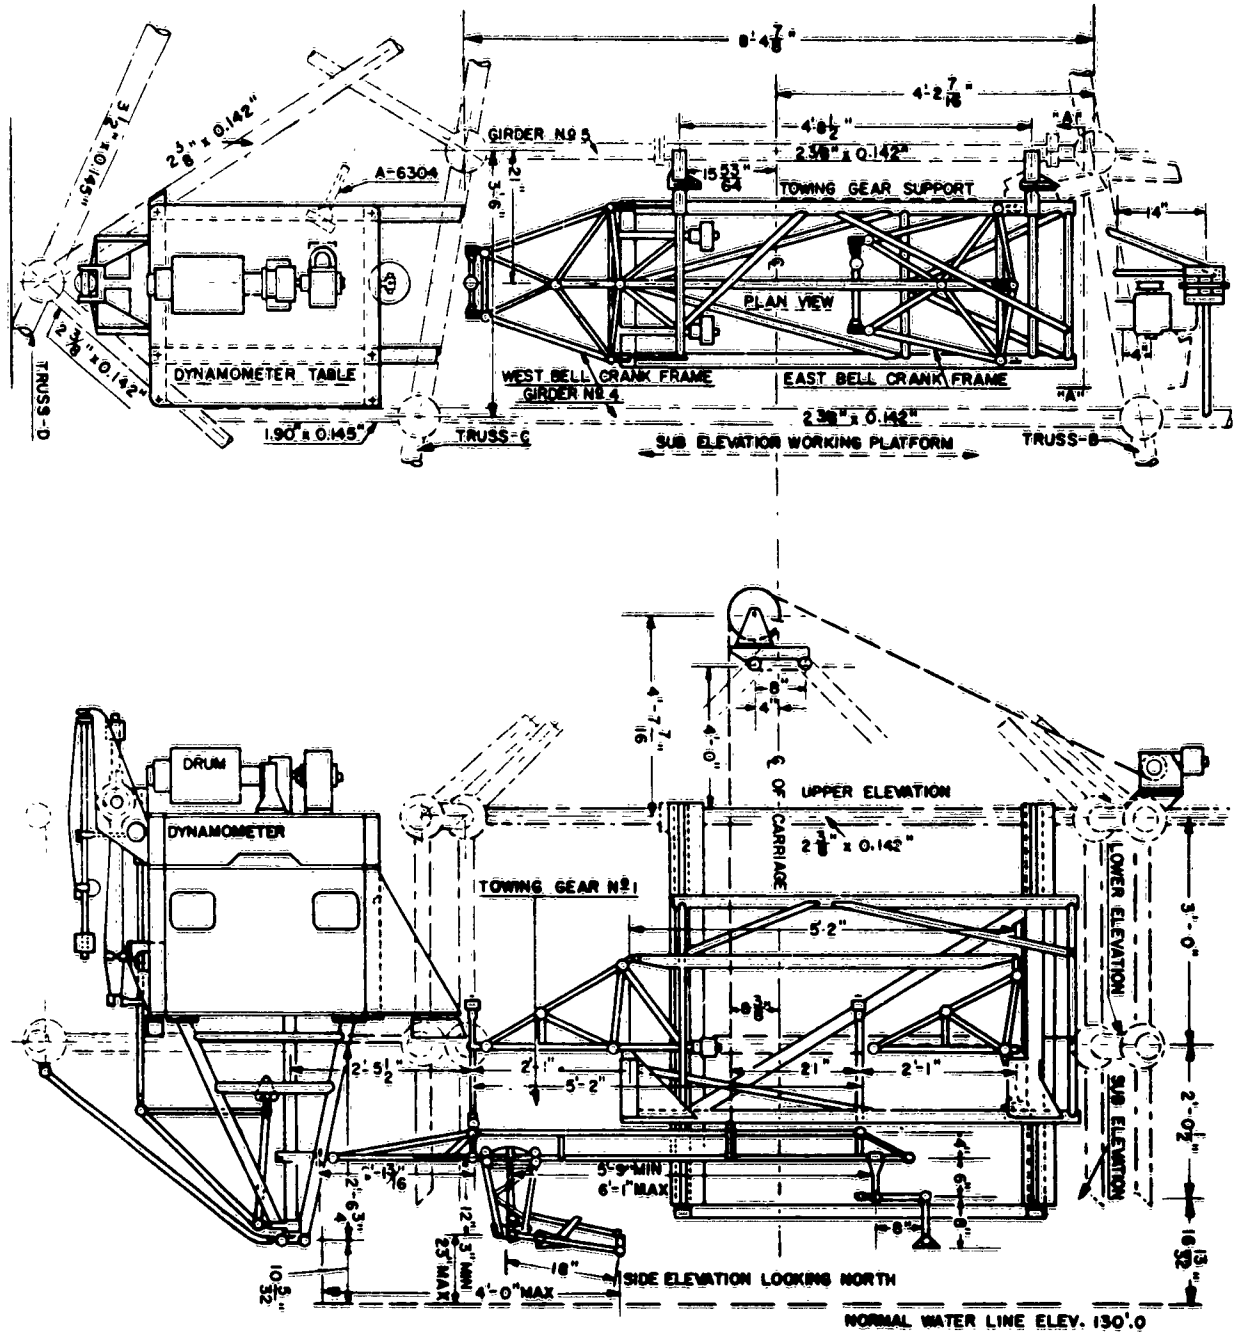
Carriage 3 Dynamometer and Towing Gear No. 1
